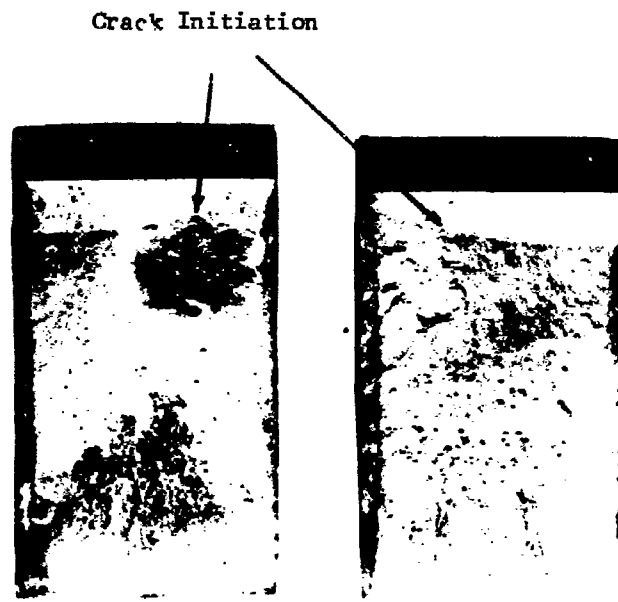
Examples of irregular fracture surfaces of HP 9-4-45 steel, precracked bend specimens
